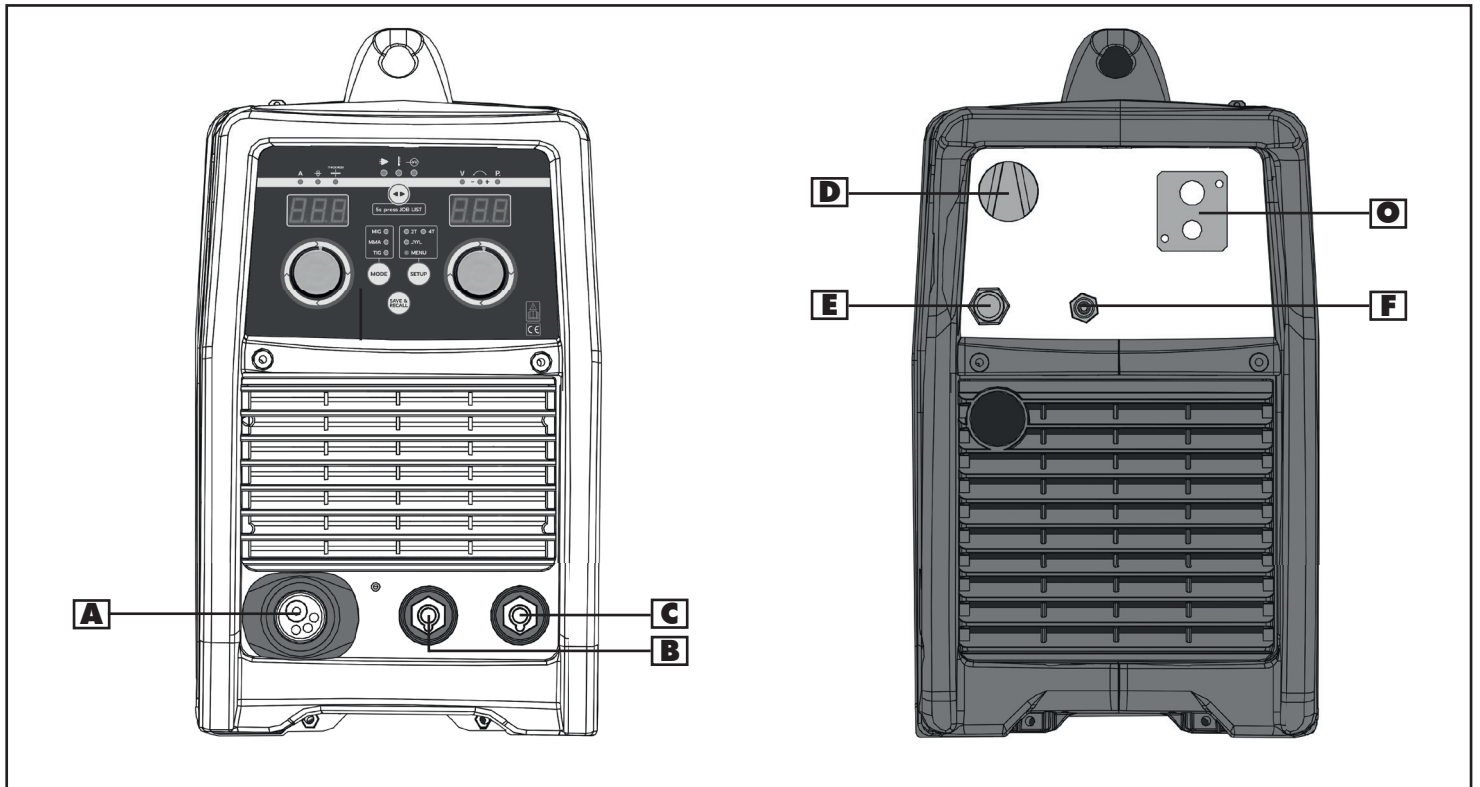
Unitech 328: Front and back view of the compact welding unit
